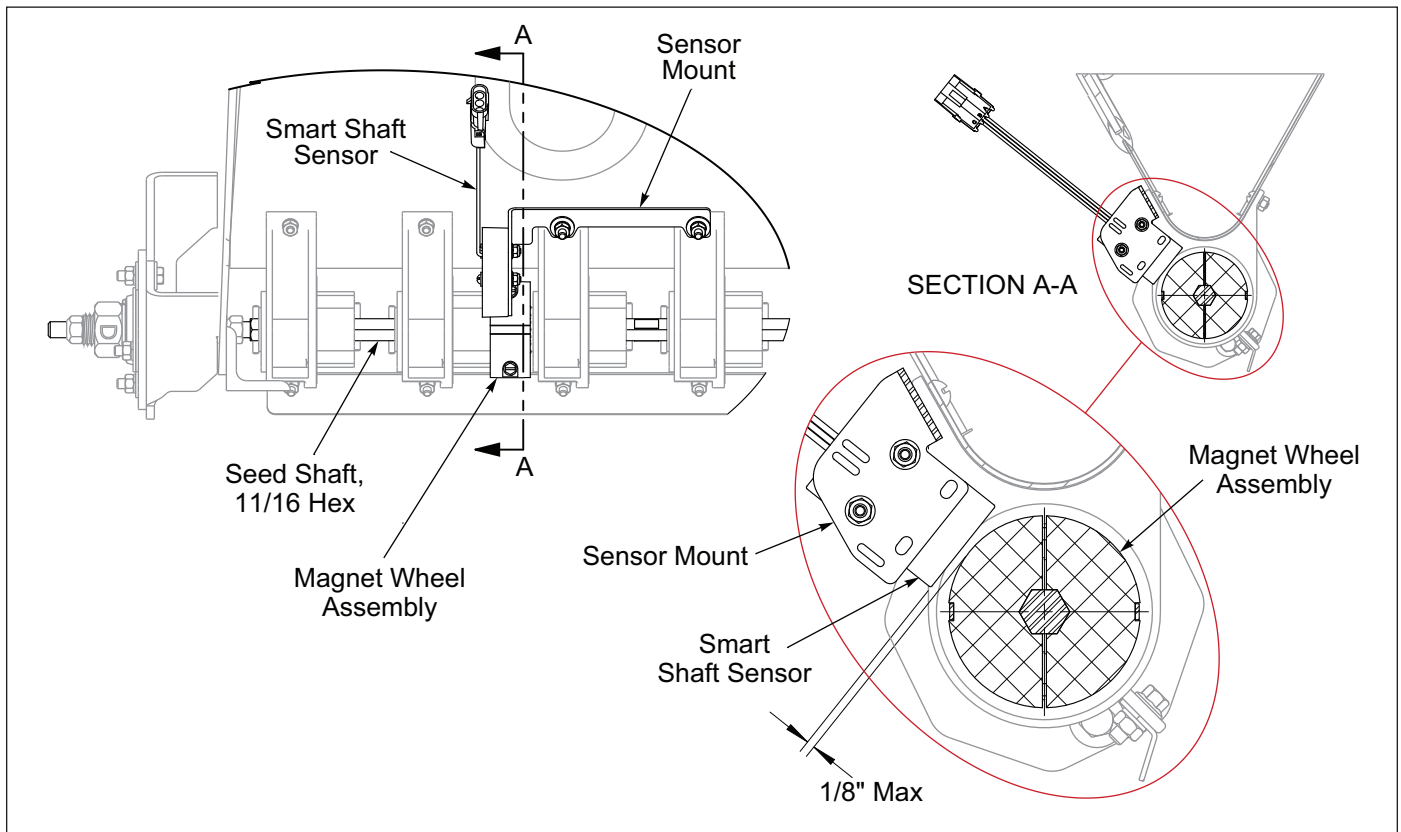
Brillion Elite Mini Monitor - Front Large Meter Seed Box Seed Shaft Sensor
